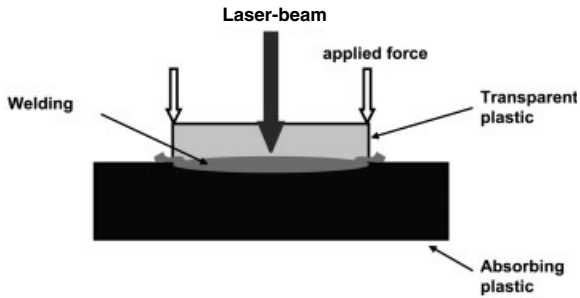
Detailed diagram of transmission laser welding
